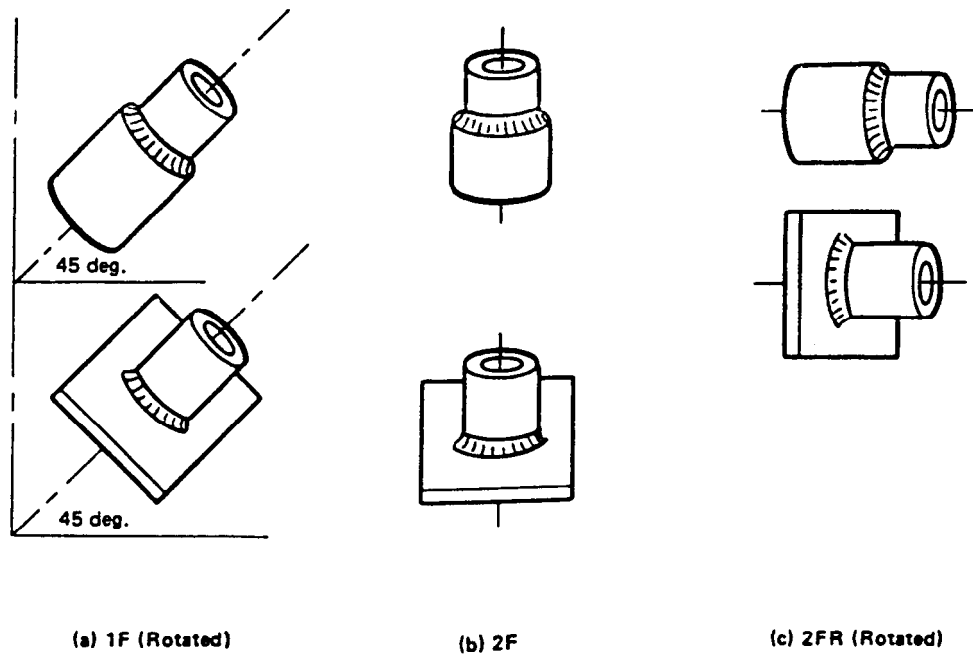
Fillet Welds in Pipe, Test Positions
